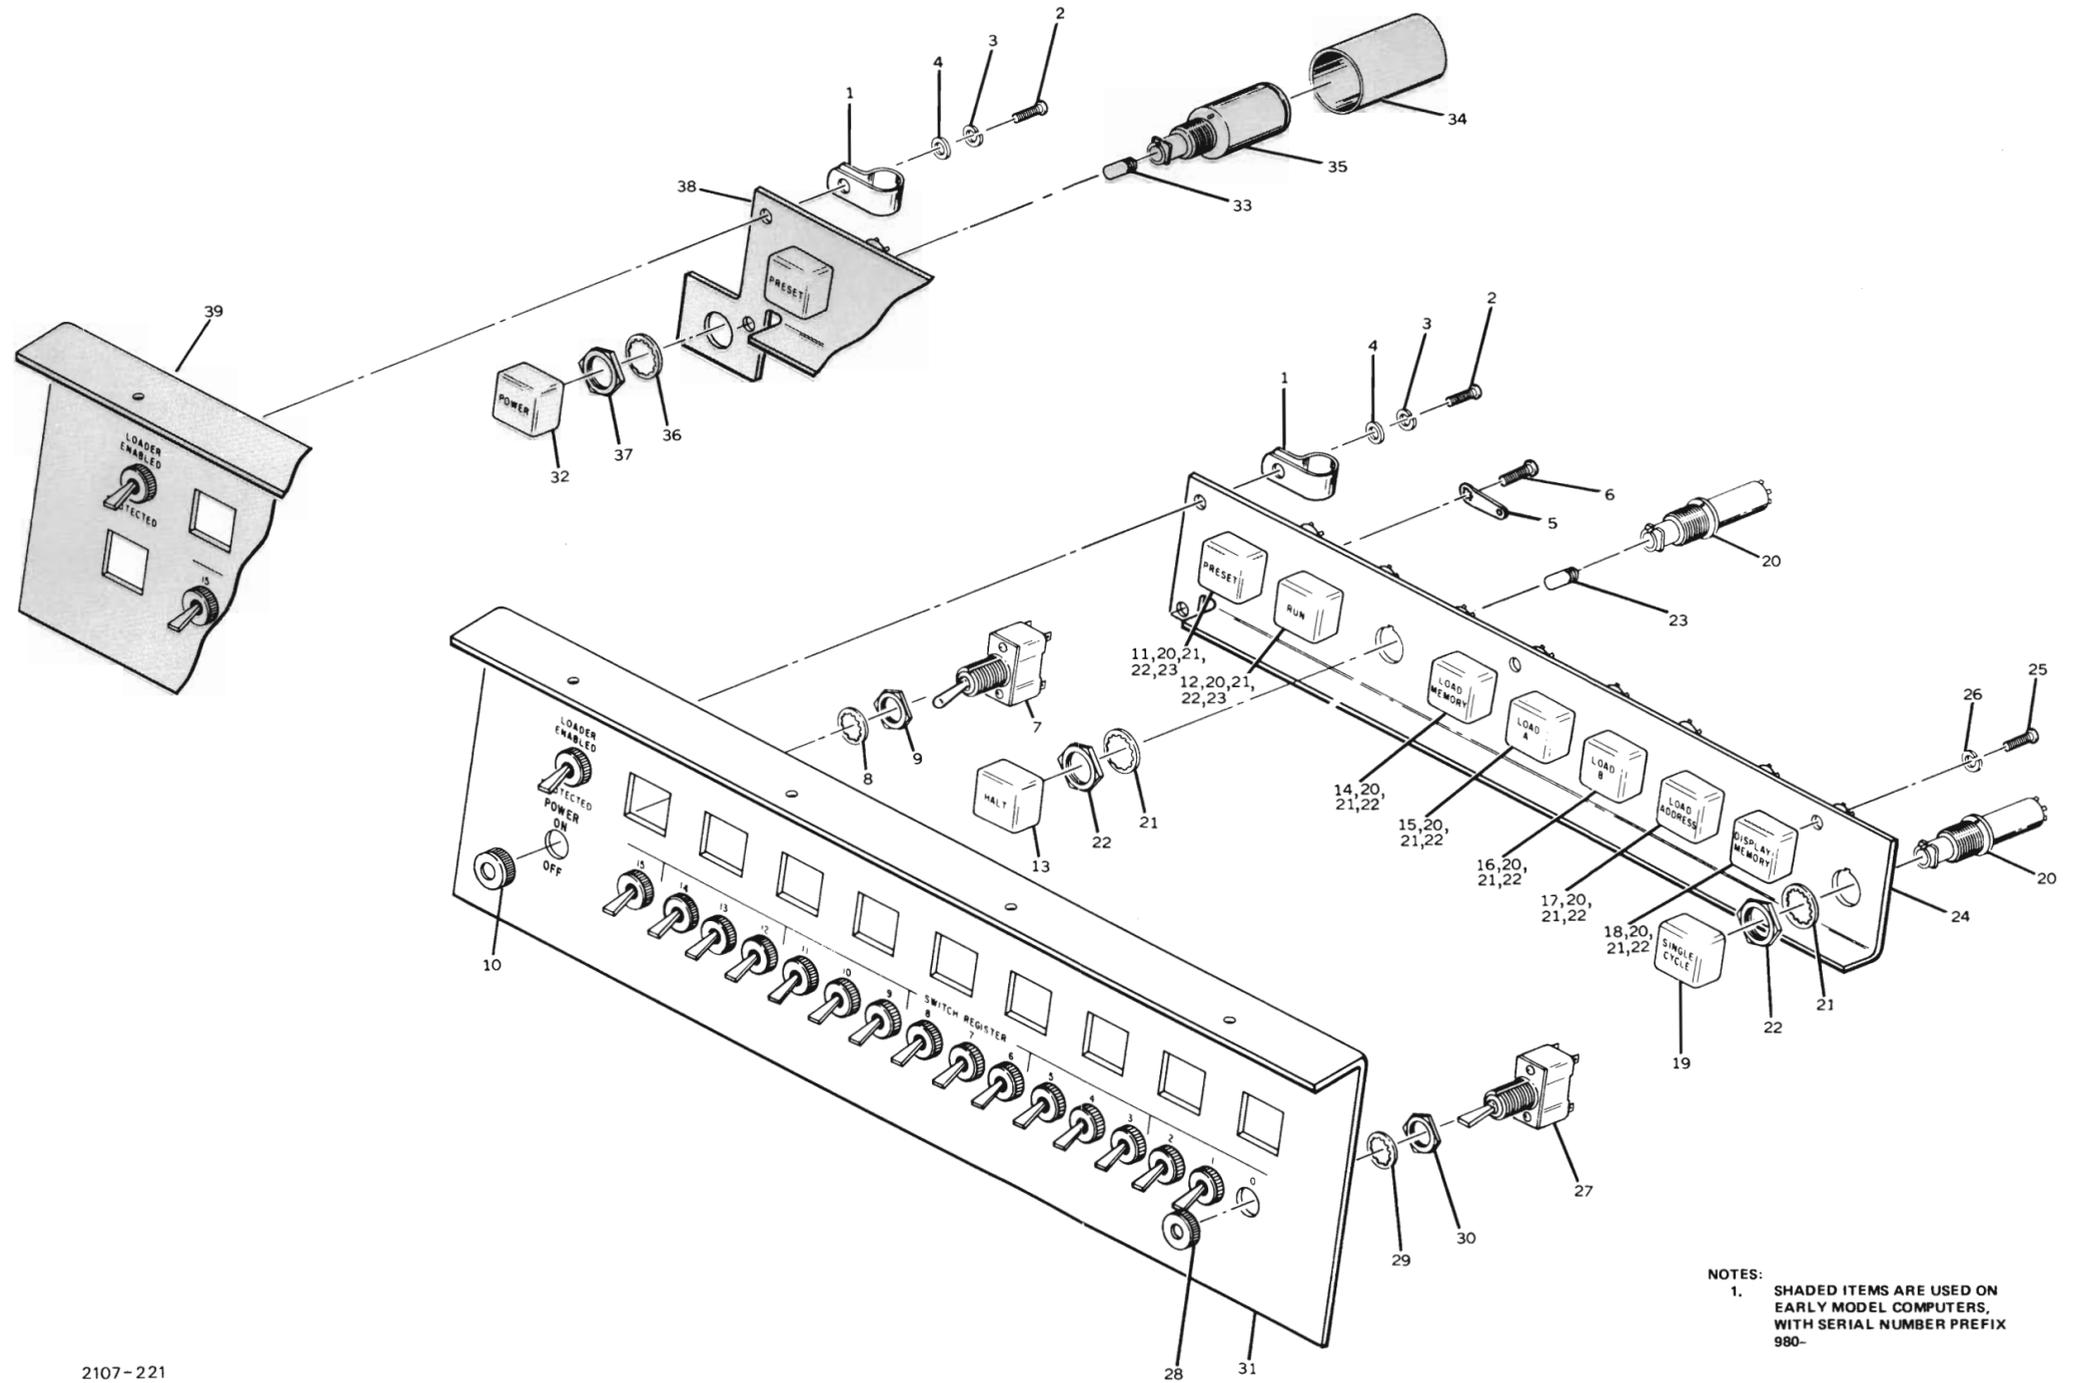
A500 Door Assembly (02116-63219), Replaceable Parts
